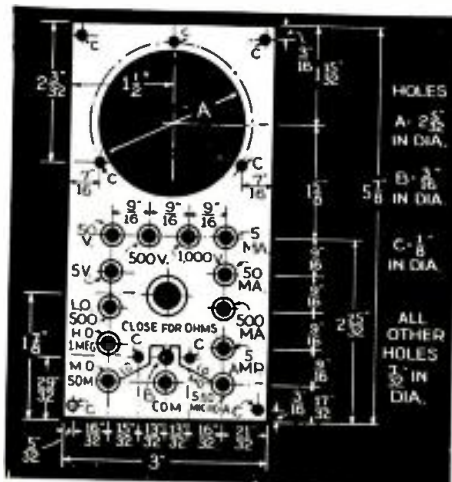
The panel drilling and engraving details. Please Say That You Saw It in RADIO-CRAFT
